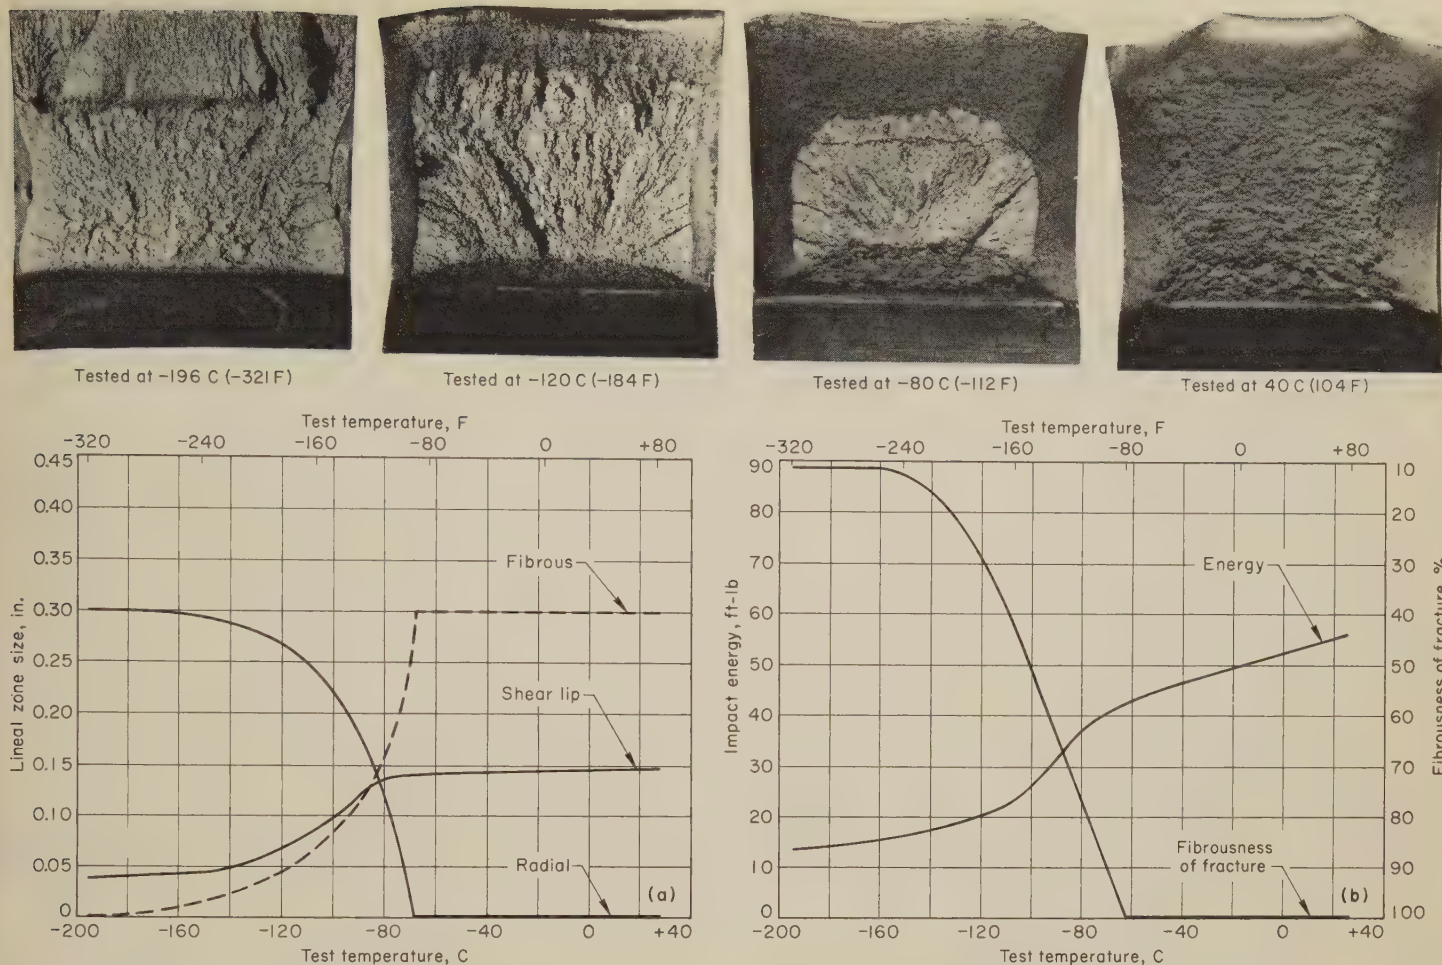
Fracture appearance as affected by test temperature, for four notched tension-overload fractures in 4340 steel (light fractographs, all at about $9\frac{1}{4}\times$)
